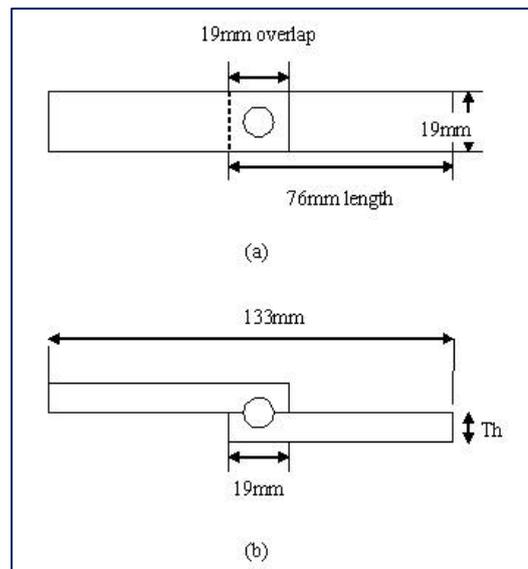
Standard dimension for tensile shear testing (a) Plan view, (b) Side view
